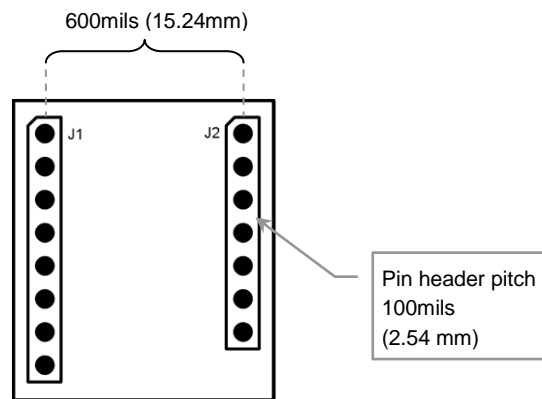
SCA8X0/21X0/3100 PWB Bottom View and Mechanical Dimensions.
